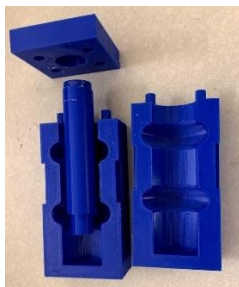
THE MOLD USED FOR INJECTION MOLDING.
